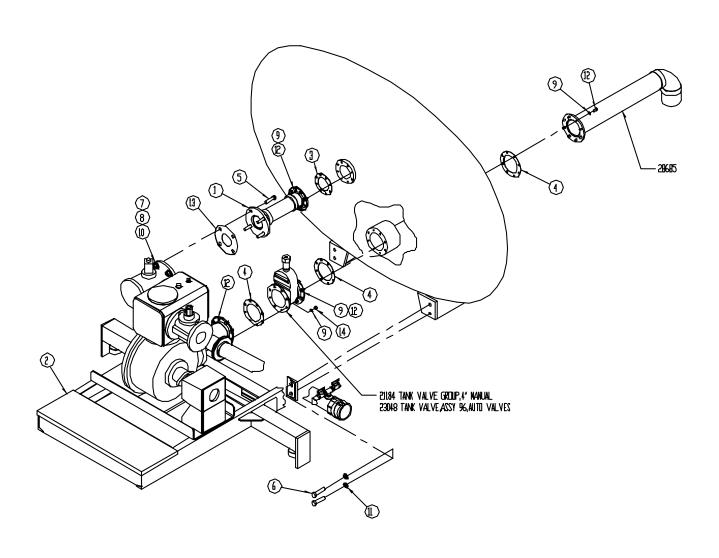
PLATFORM INSTALLATION, W/O HANDRAIL
